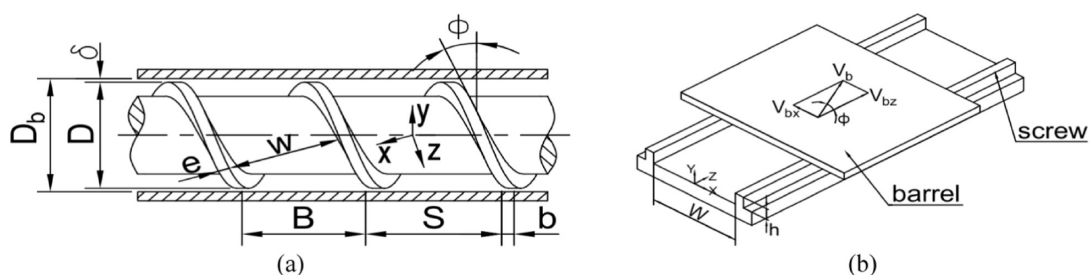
Mixing section of a standard extrusion screw: (a) structure of the mixing section and (b) simplified model.
